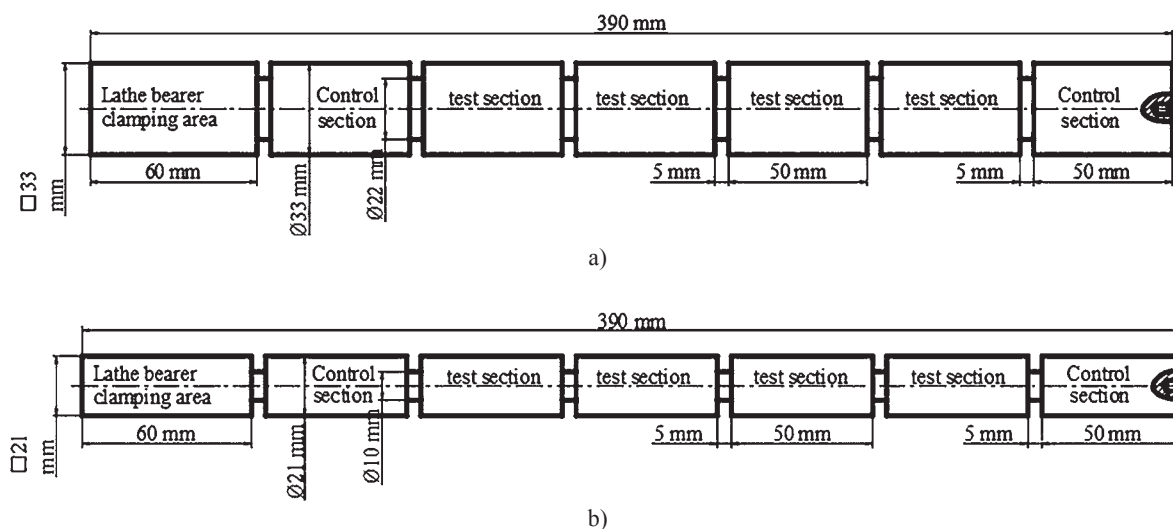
Technical drawing of test specimens: a) test specimen with large diameter, b) small diameter test specimen
